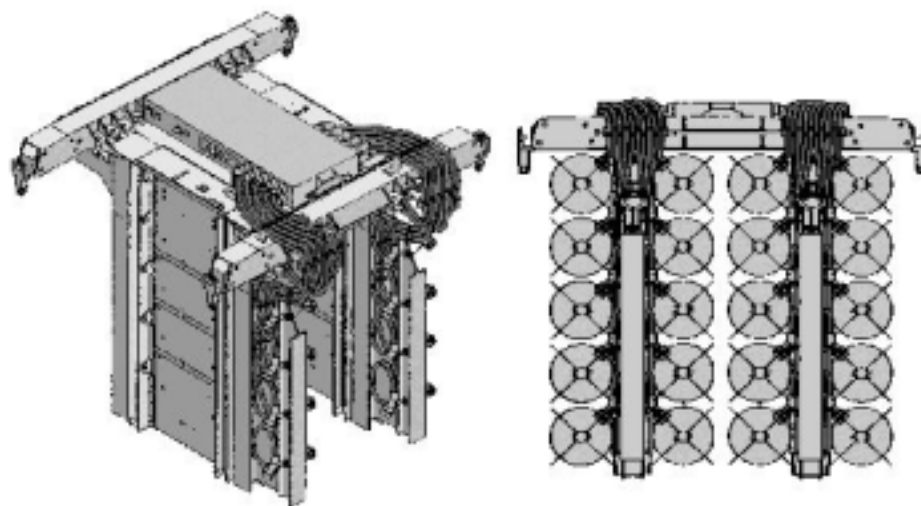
Smart Bomb Release Assembly for B-2 showing 1760 Wiring
